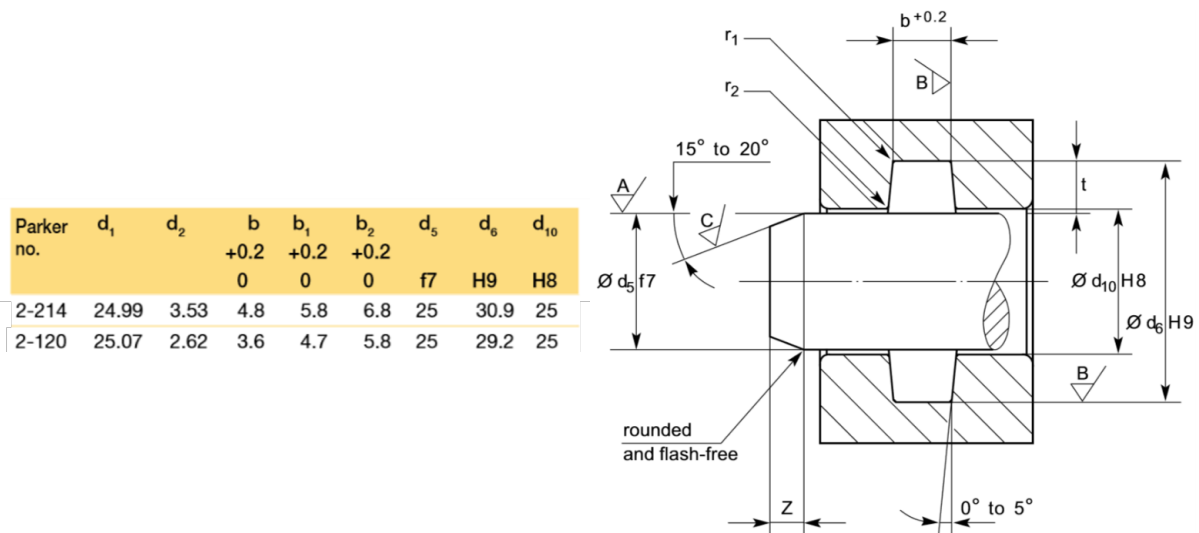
25mm diameter size atching o-rings (left); Schematic for hydraulic rod seals (right) [22]
